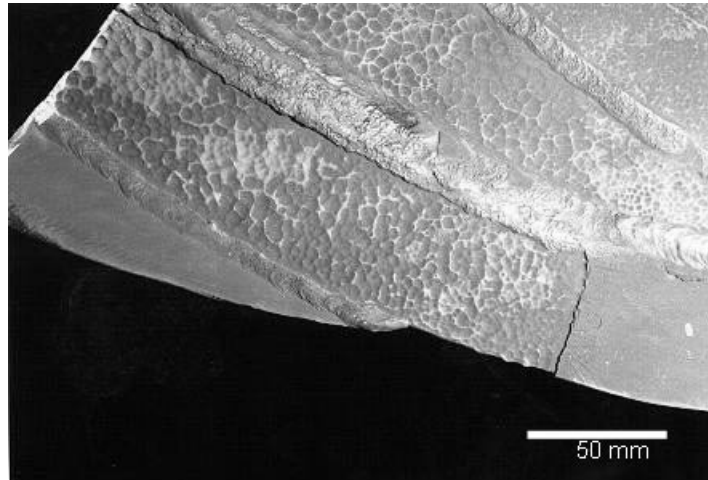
Metal dusting pitting attack on alloy 600 adjacent to the undamaged alloy 800. From Holland and deBruyn.<sup>[17]</sup>
